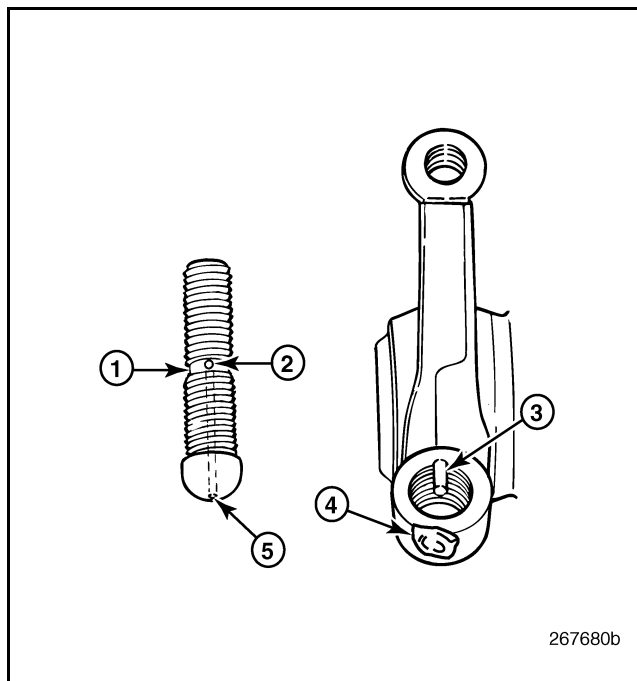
Rocker Arm and Adjusting Screw with Oil Passages (Introduced January 2002)
